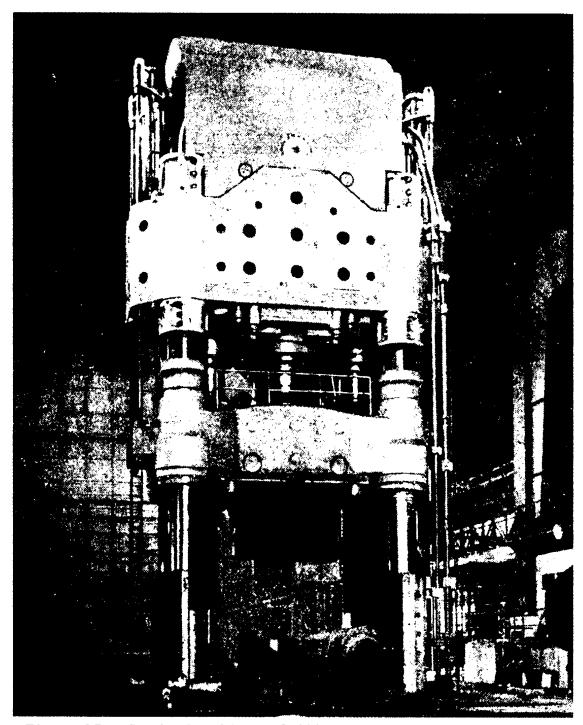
Czechoslovakia: 12,000-Ton Hydraulic Forging Press
